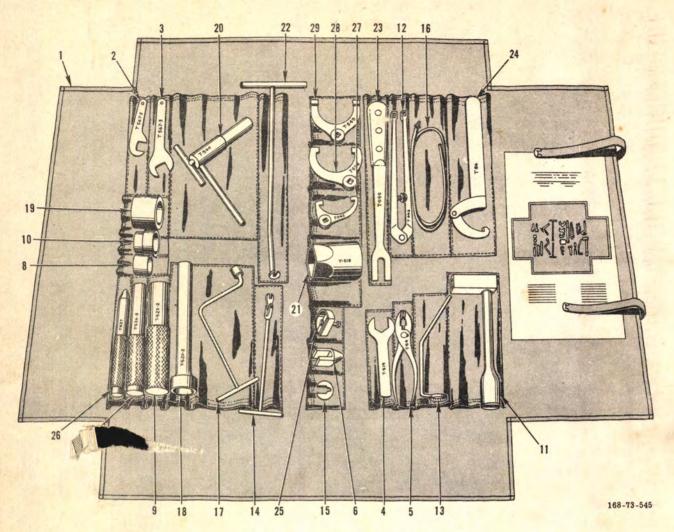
MAJOR OVERHAUL TOOL KIT
